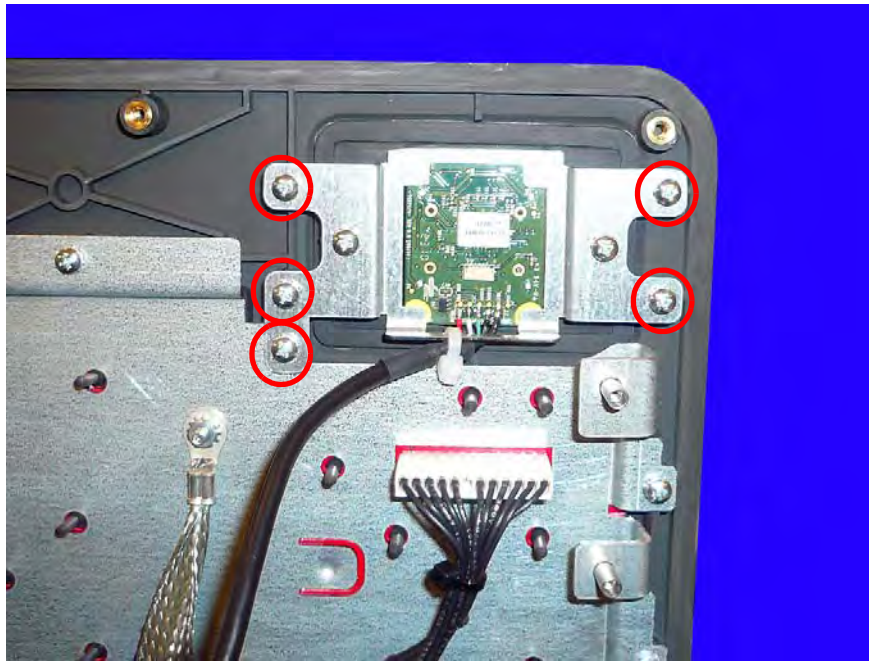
Remove the five screws that secure the fingerprint sensor
